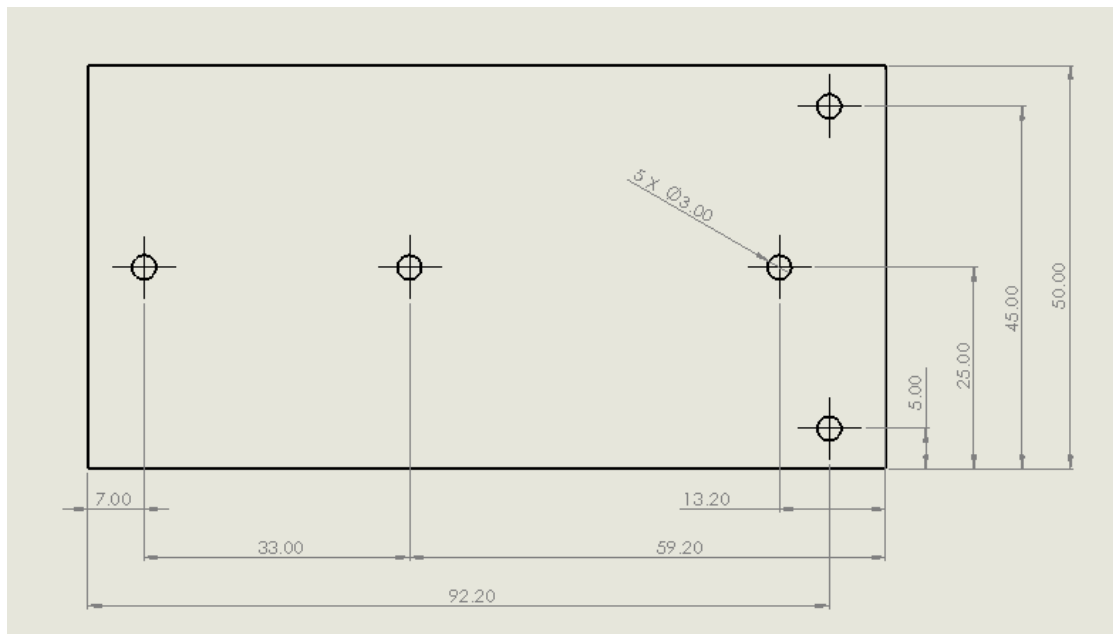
Technical drawing - Transverse support plate (for side camera)
